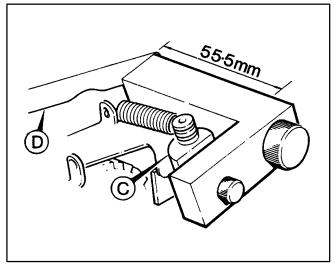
SETTING THE FUEL RACK NO-FUEL POSITION WITH A GAUGE
